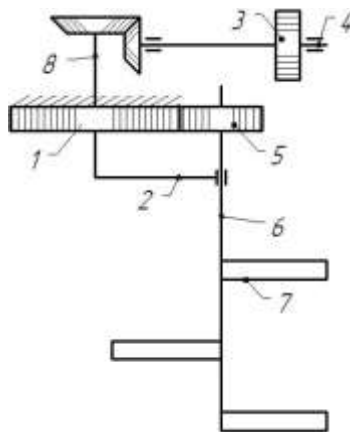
Planetary mixer: 1, 3, 5 – gears; 2 – carrier; 4 – shaft; 6 – agitator shaft; 7 – blades; 8 – drive shaft
